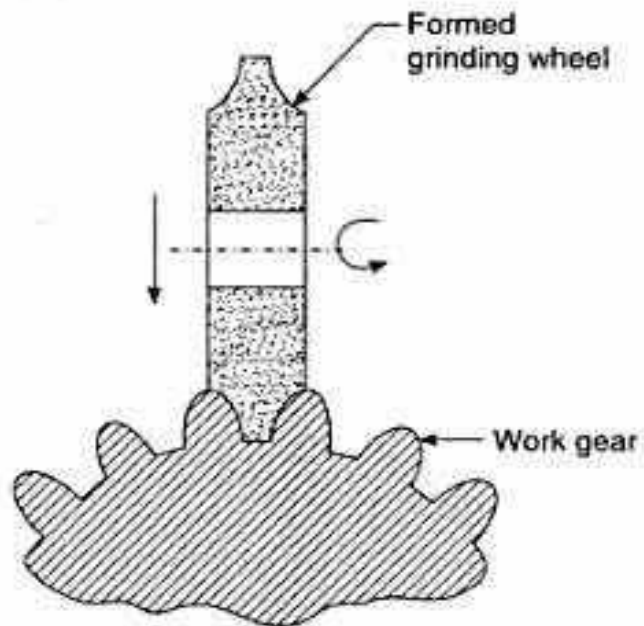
Grinding a gear with formed wheel grinding method.
